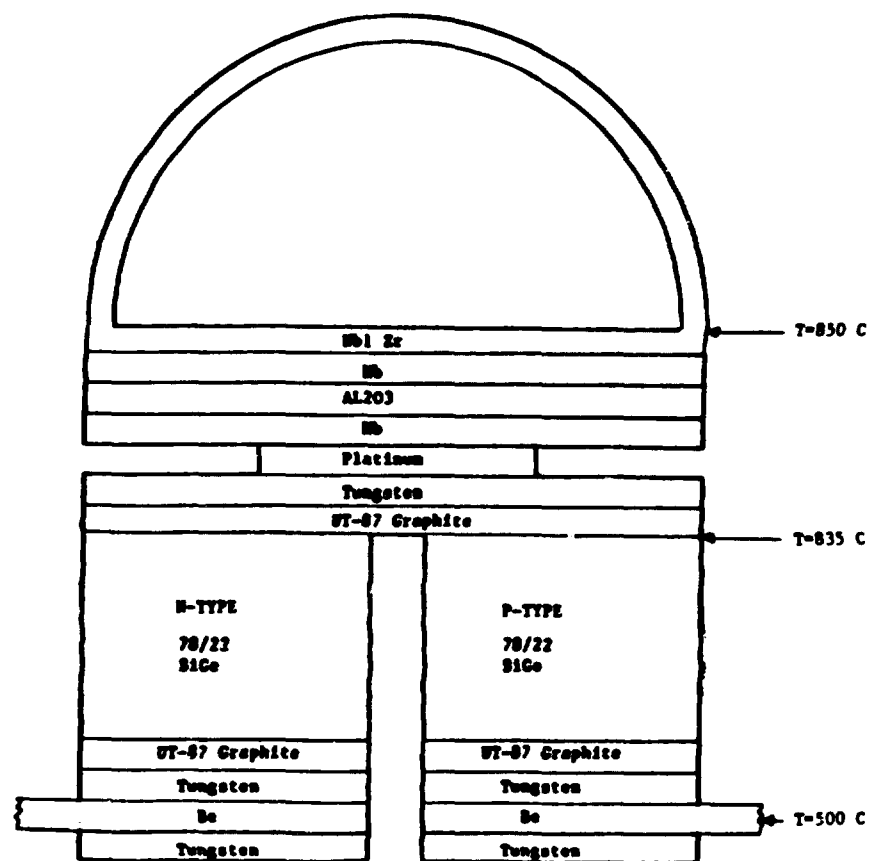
Unicouple Assembly Shown Brazed to D-Cross Section Heat Pipe.
